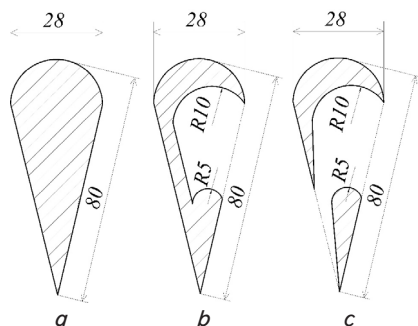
Shapes of wind wheel blades: *a* – flat blade; *b* – blade with «pocket»; *c* – blade with «pocket» and slit
